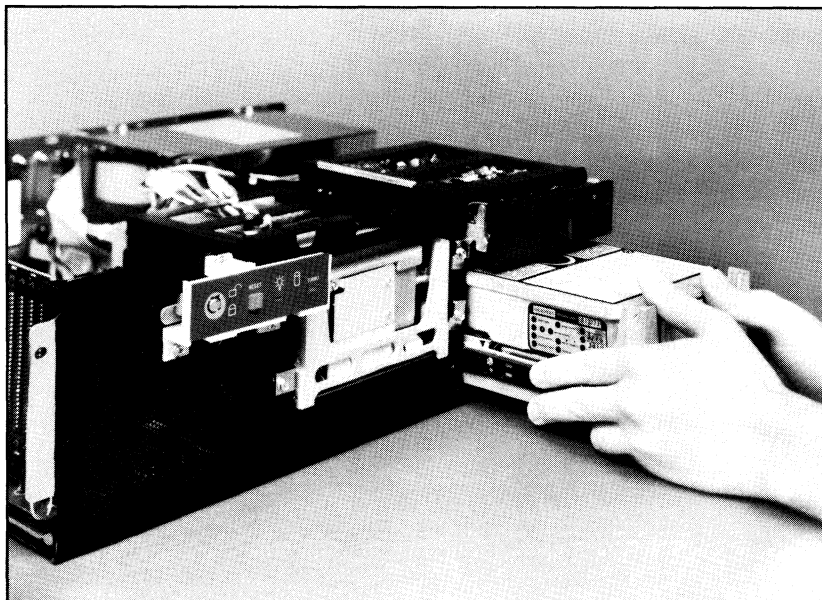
Mounting Location of an Optional Hard Disk Drive
